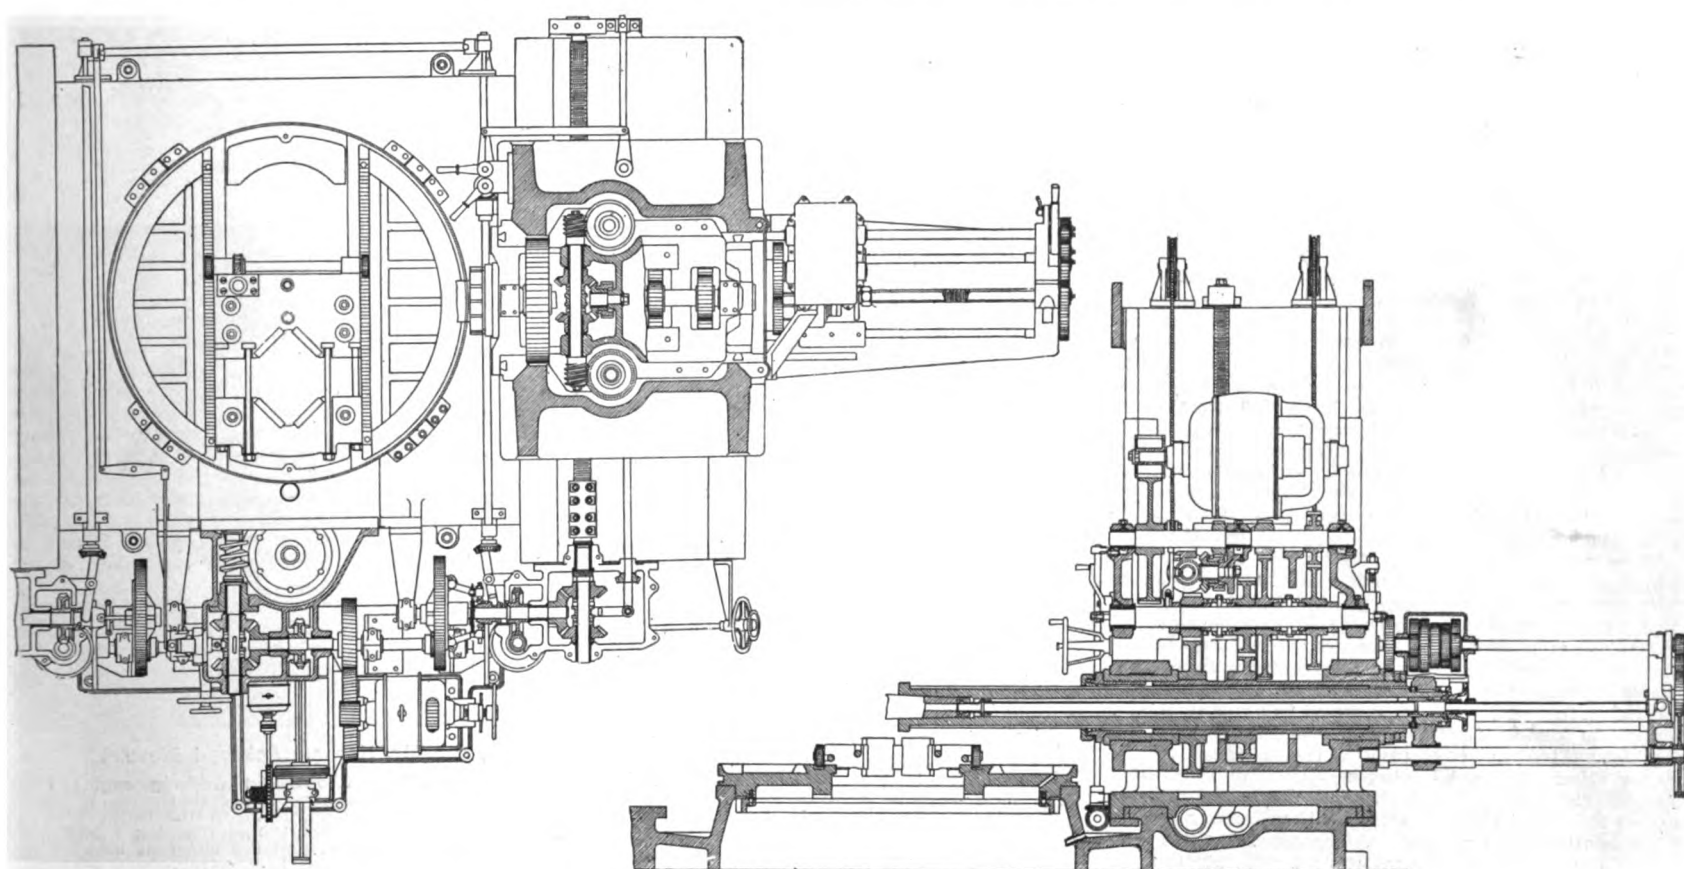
Drawings of the original B. & W. crankshaft machine. The American model has been slightly modified.
